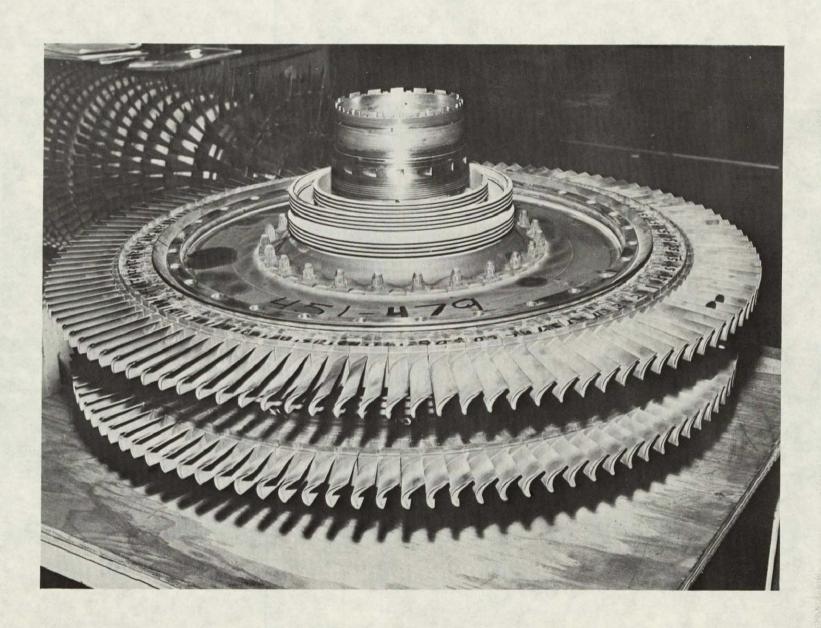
HP Turbine Rotor, Overall View of Blades.
